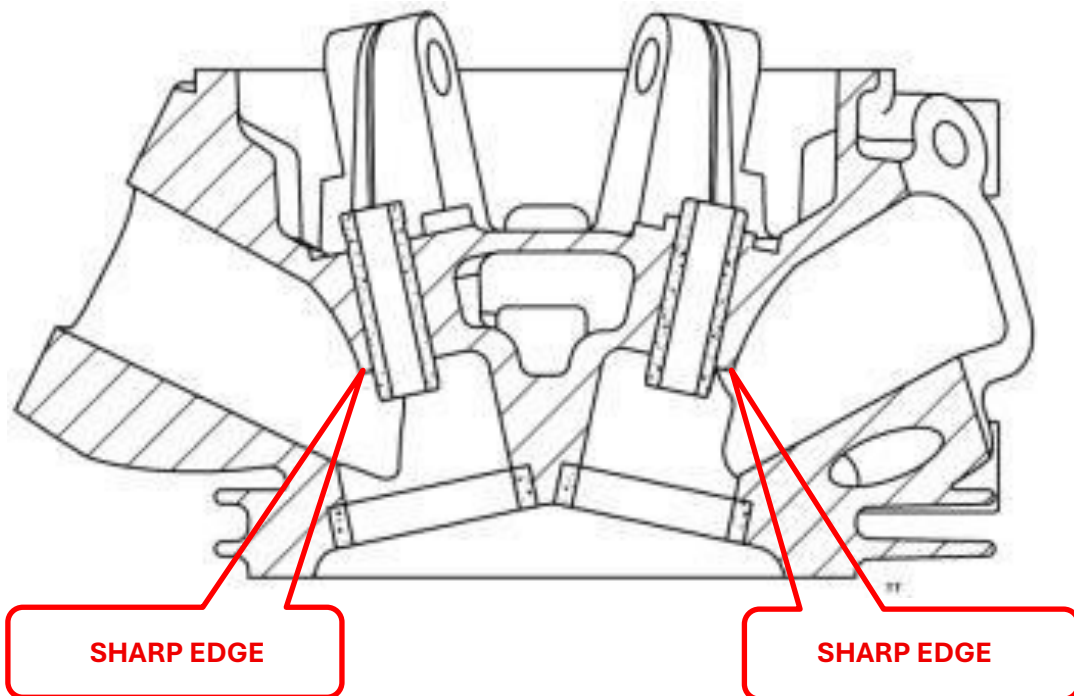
PHOTO OF THE COMBUSTION CHAMBER IN THE CYLINDER HEAD
